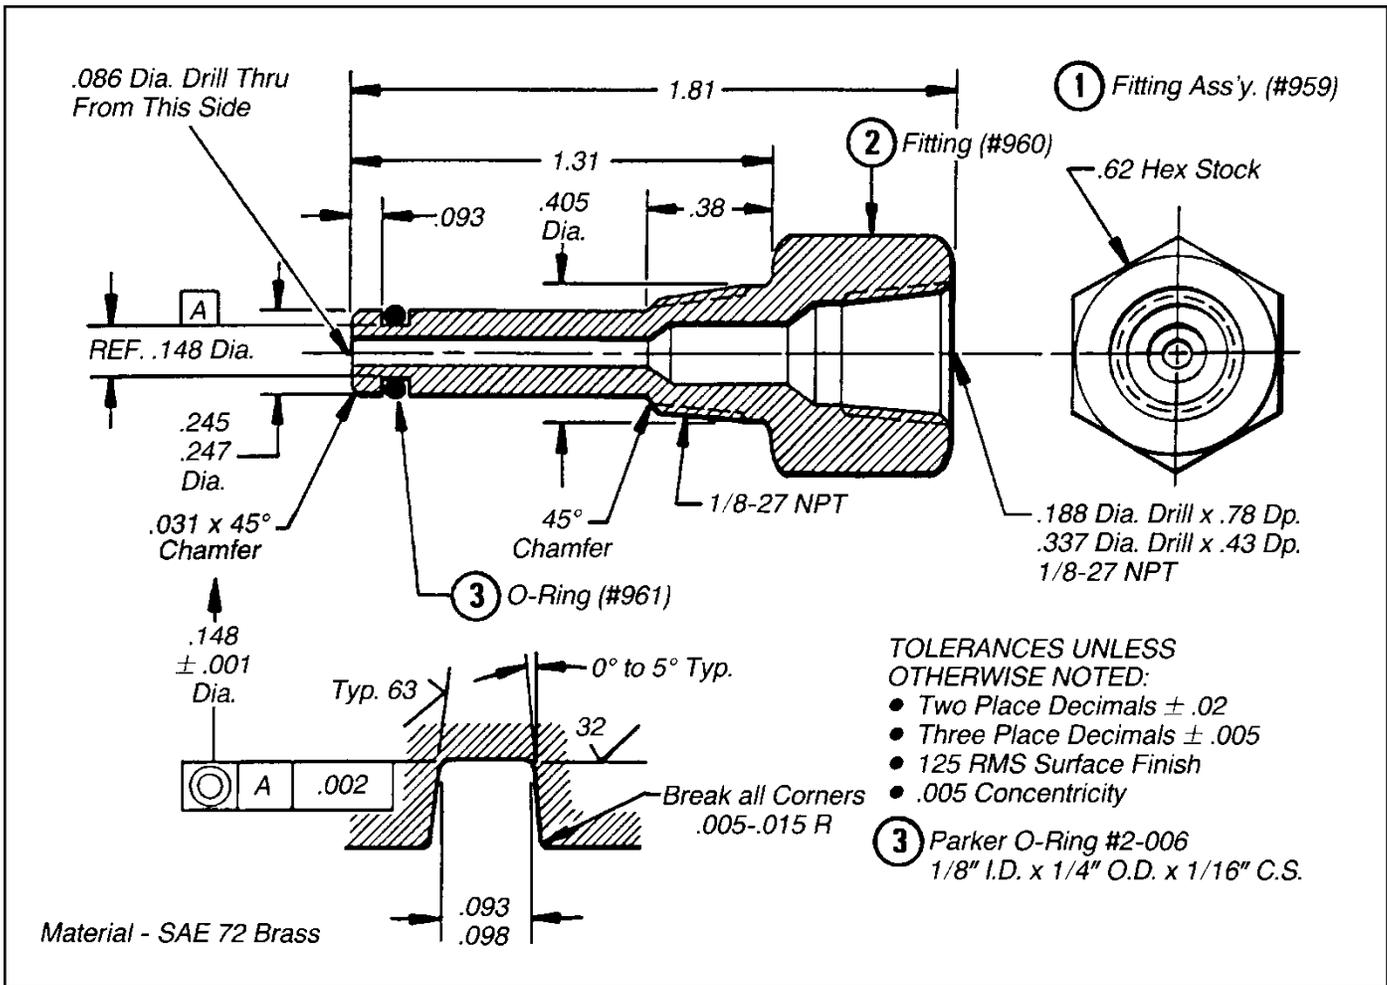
Machining Dimensions For Special Pneumatic Operational Check Fitting
